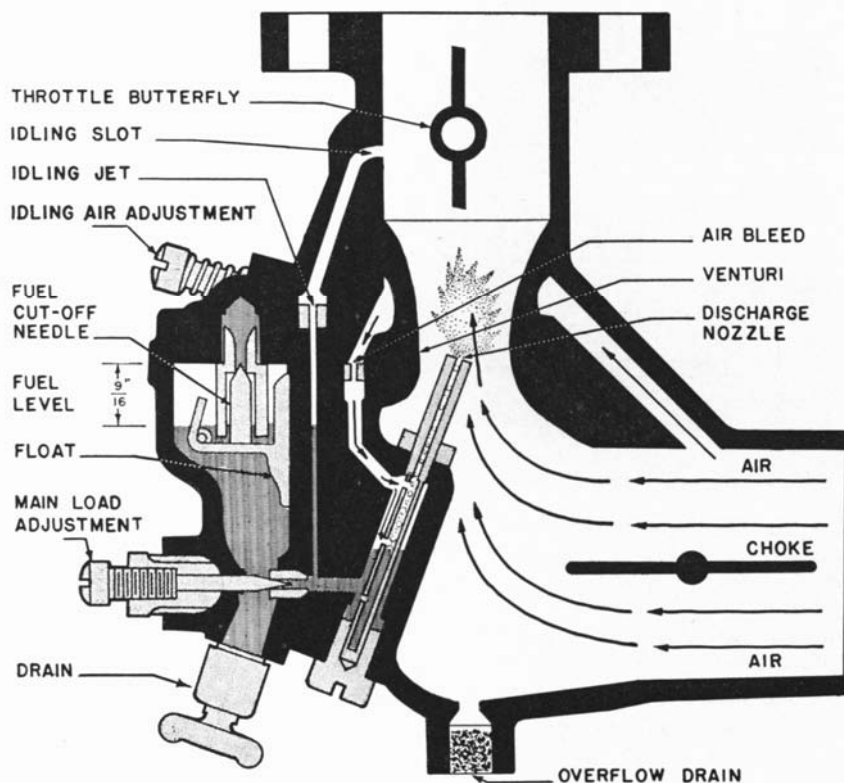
Air-bleeder tractor carburetor operating at full load
